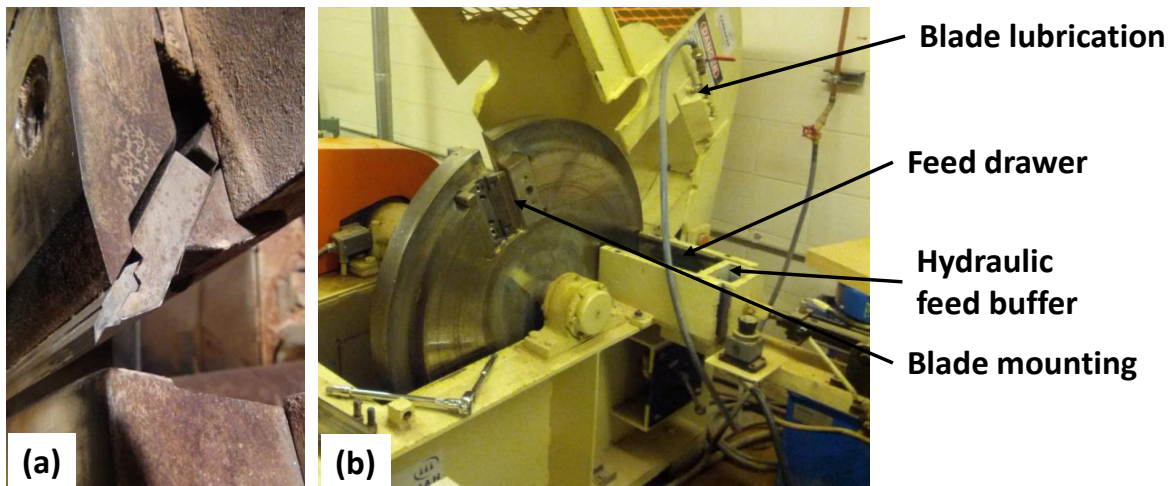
CAE 6/36 Lab Flaker showing (a) removable slicing blade, and (b) disk, housing and feed drawer.
